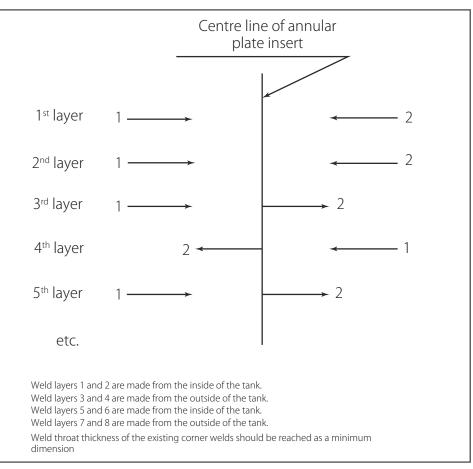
Welding sequence for shell-to-bottom junction
